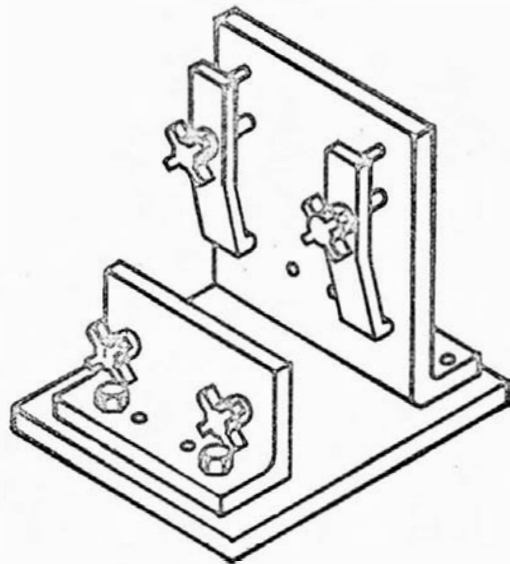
15. Base Heatshield Channel Assembly, Assembly Fixtures
